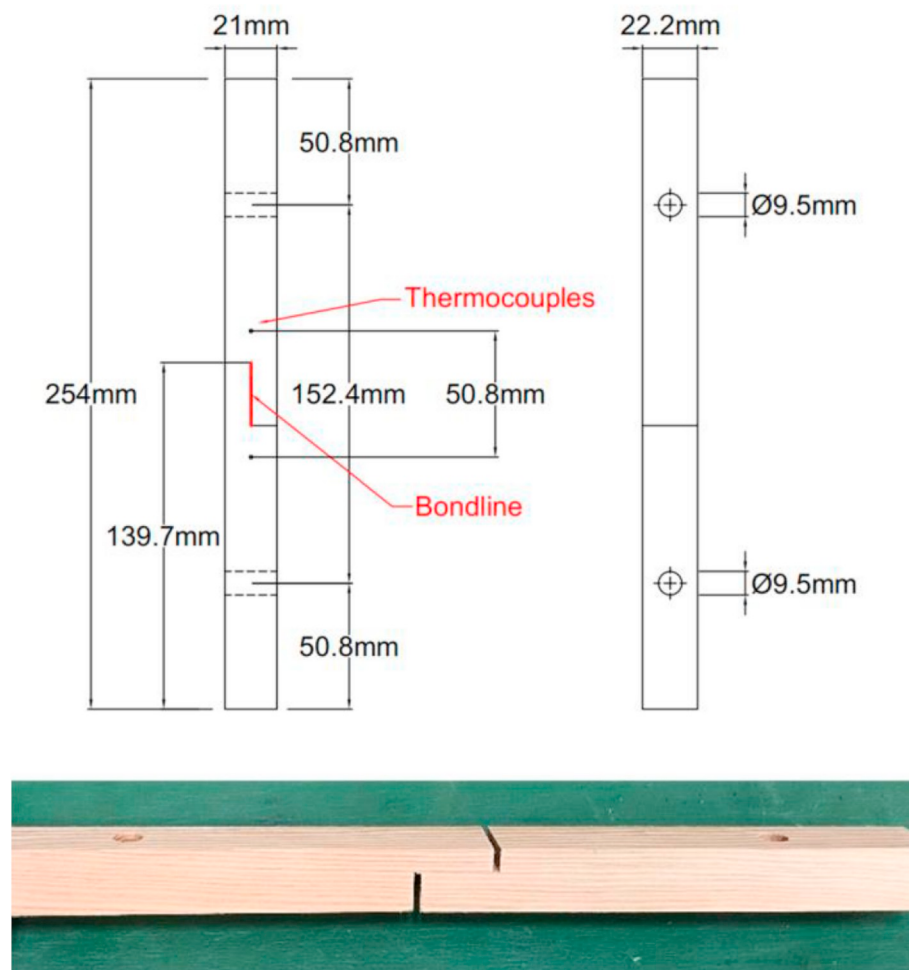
Geometry of the shear test specimen (tensile test used geometry specified in ASTM D143). Bottom: photograph of a typical shear test specimen; for shear “solid wood” specimens, the two grooves were cut into a single piece of wood to give a sample with the same geometry as the lap shear specimens.
